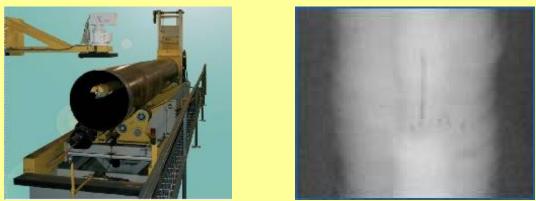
Pipe inspection machine, able to inspect steel pipes up to 25 m length (on the left); Crack in welding seen in steel pipe (on the right).
